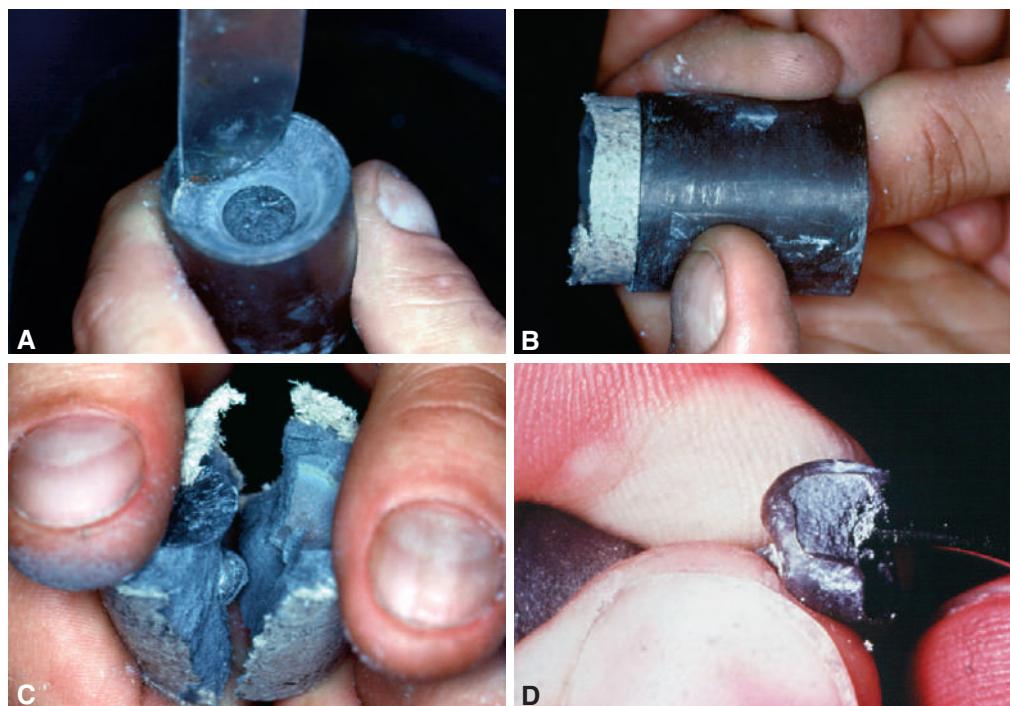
Recovery of a casting from phosphate-bonded investment. (A) Trimming is done from the button end of the ring. (B) Investment is being pushed out of the casting ring. (C) The mold is broken open. (D) Investment is removed from the casting. Care must be taken to avoid damaging the margin.
